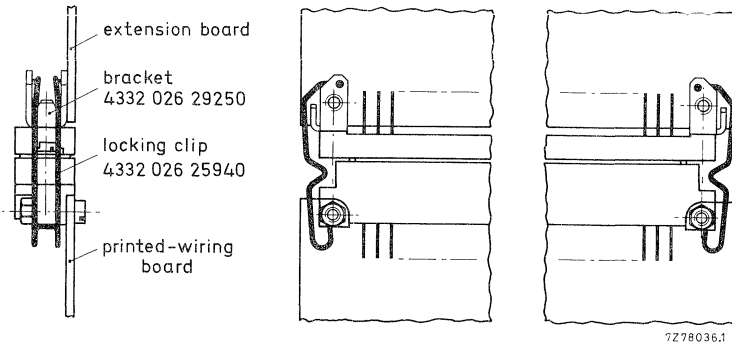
Mounting of a female part to an extension board with bracket having locking facility.
